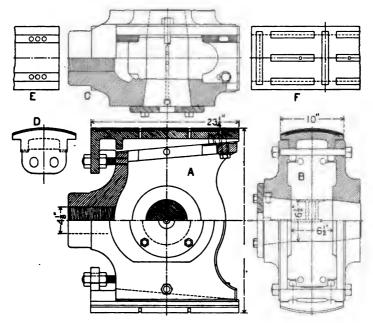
Cross-head for Corliss Engine, to go with piston in Fig. 278.
